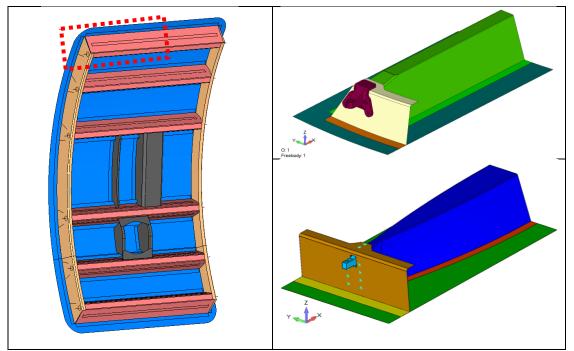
Cut-out section of passenger door (left) and design proposals (left).
